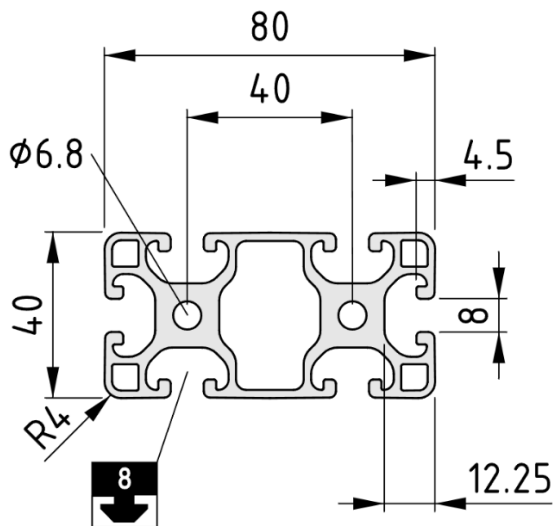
Technical drawing of Item 80x40 mm profile (item Industrietechnik GmbH, 2025a)
